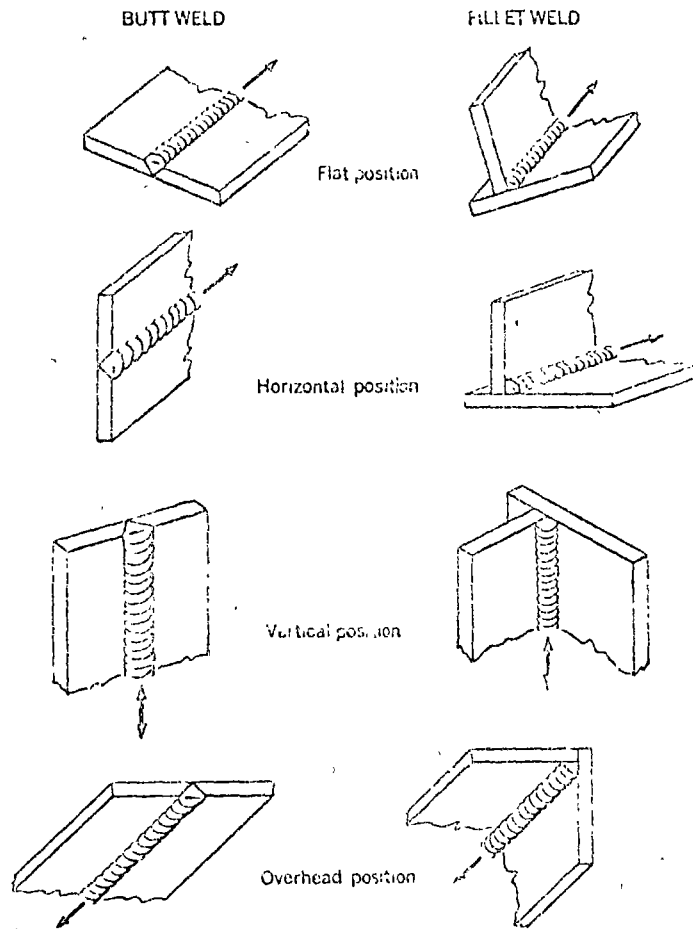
Positions of welding for fillet and butt welds. (Courtesy of American Welding Society.)
